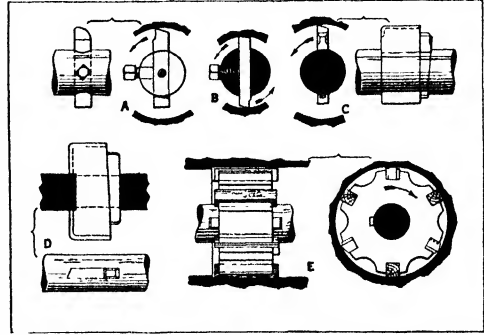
SUPPORTED BORING TOOLS (A) SINGLE-ENDED CUTTER IN BORING BAR (B) SAME, DOUBLE-ENDED (C) FLAT SINGLE-ENDED FINISHING CUTTER, (D) SAME, DOUBLE-ENDED, (E) BORING HEAD WITH THREE CUTTER AND THREE STEADY BLOCKS
